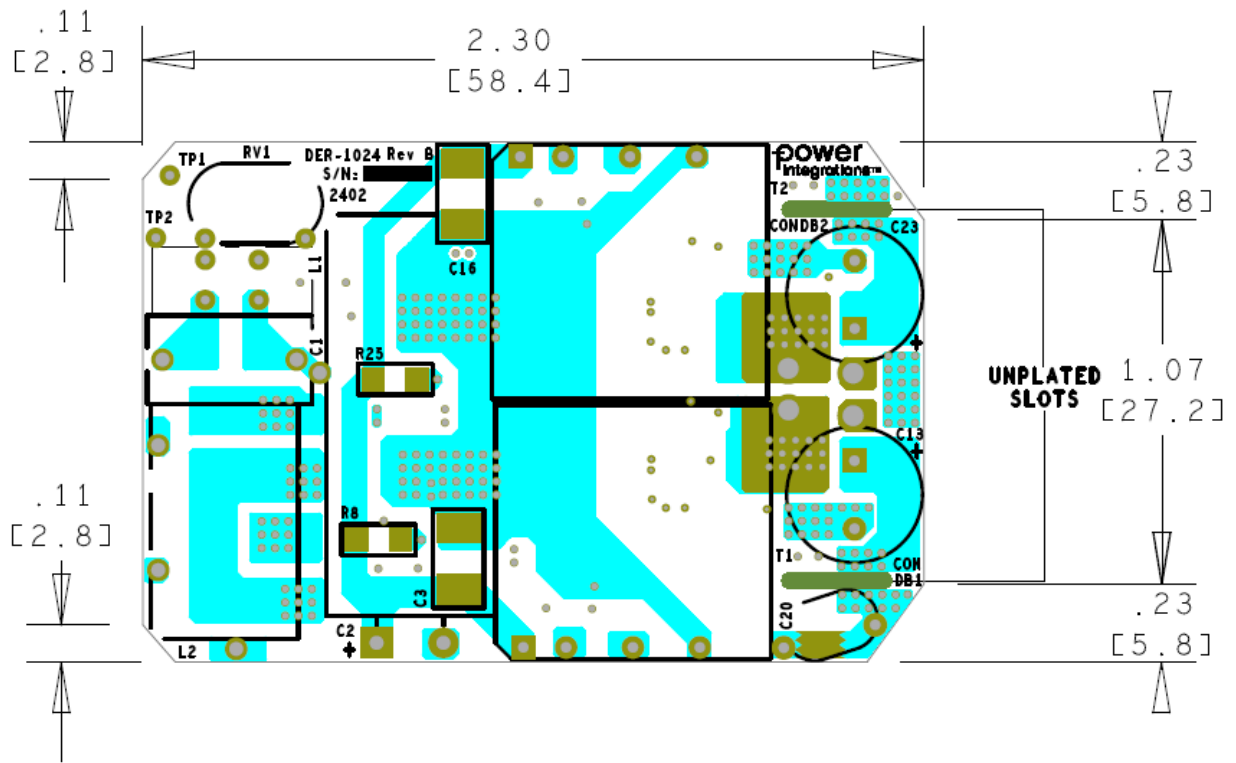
DER-1024 Mother Board Rev B Printed Circuit Layout (Top).
